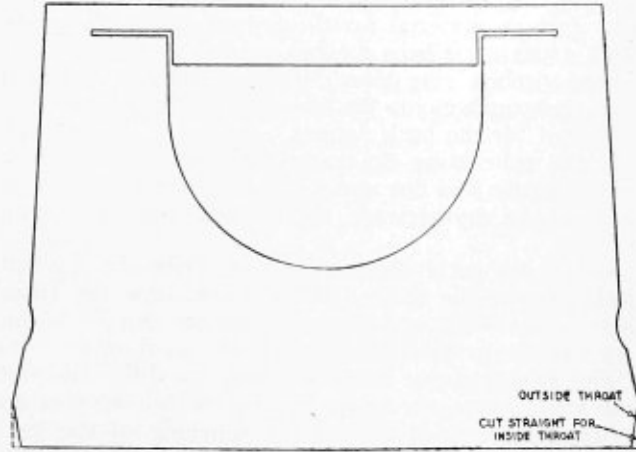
Throat pattern plate of Fig. 31—trimmed ready for flanging and for marking off duplicate plate. The piece shown at top is used in connection with a four-piece, single-heat, double-operation die
